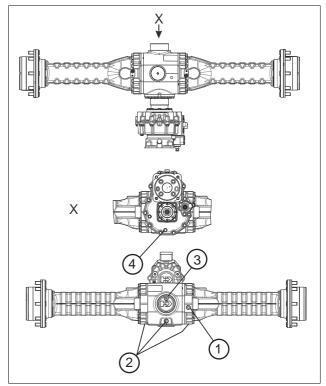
TL120 S - Changing the axle oil of the rear axle
